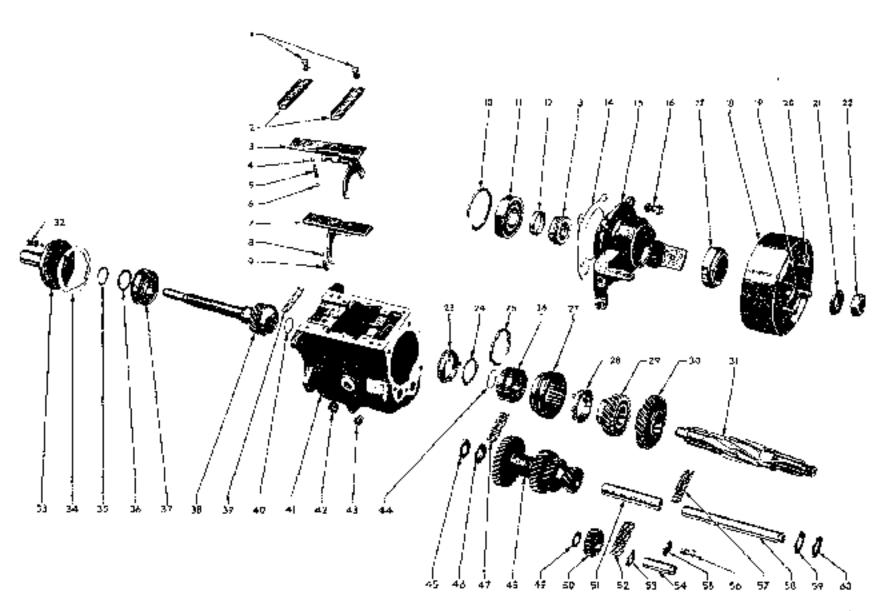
Transmission (Disassembled View) (1939 Model PS)
